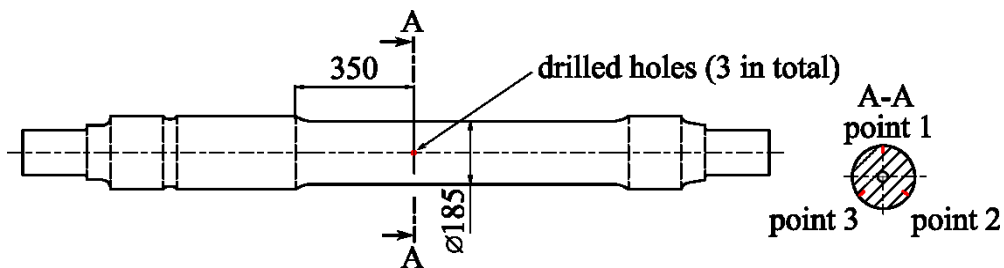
Position of the drilled holes at the axle and a detailed view of three holes in the cross section
